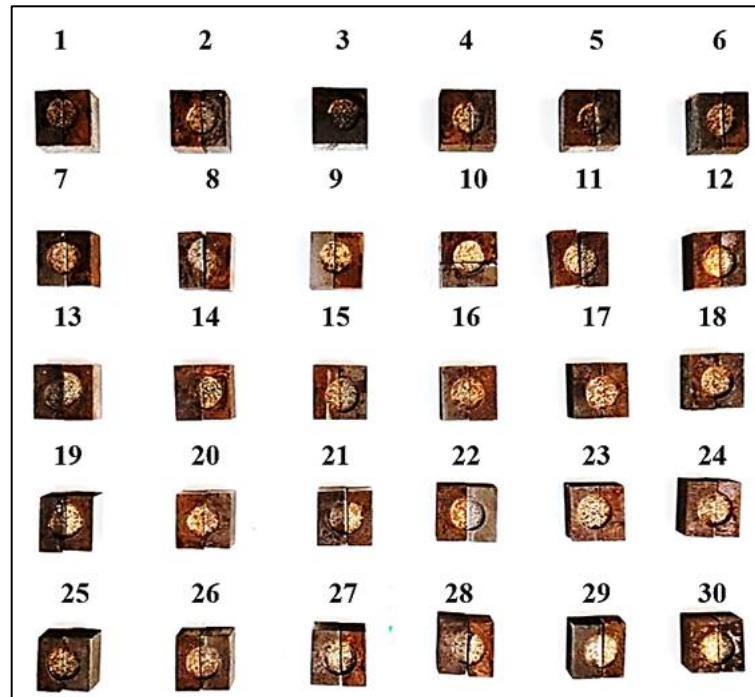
Workpiece Alloy steel (X210) after machining for L30 array
